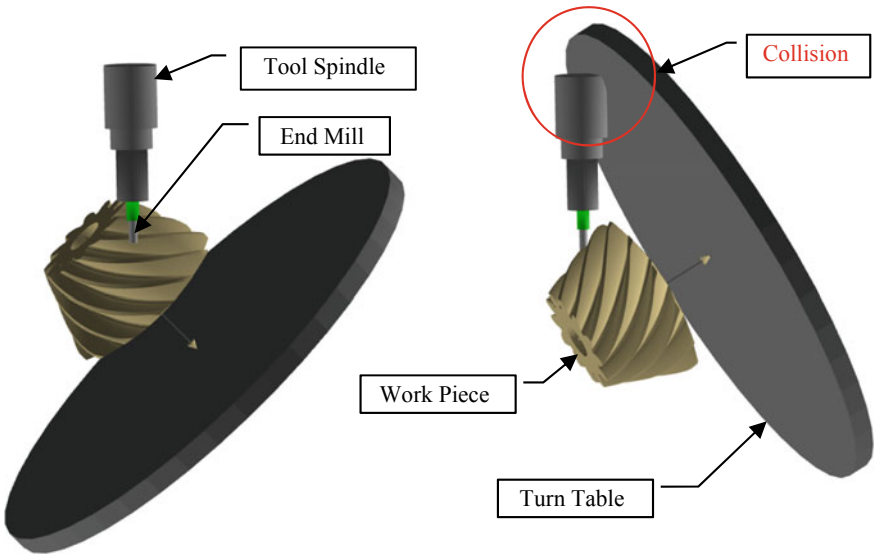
Tip chamfering with EM cutting edge—spiral bevel pinion
